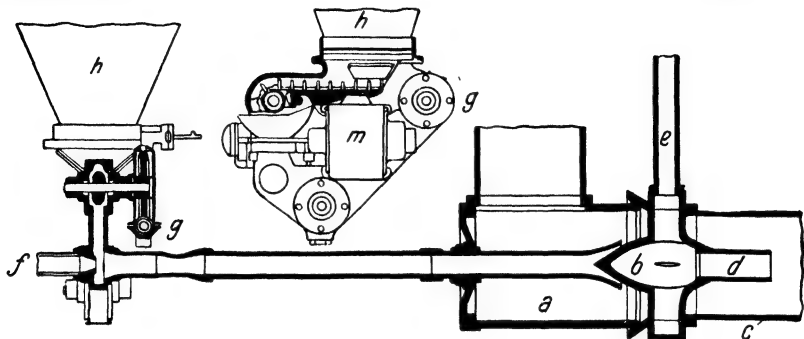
Furnace with Compressed Air and Coal-dust Injectors
